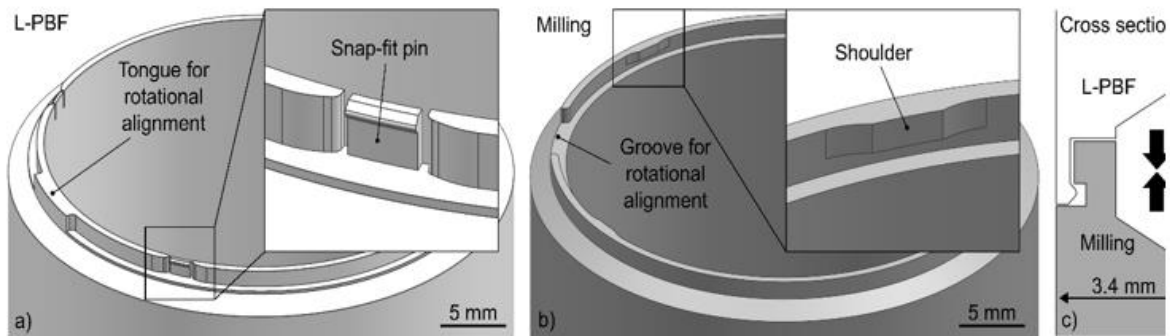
Snap-fit design with a) L-PBF geometry with tongue and pin, b) milling geometry with groove and shoulder, c) schematic assembly design
